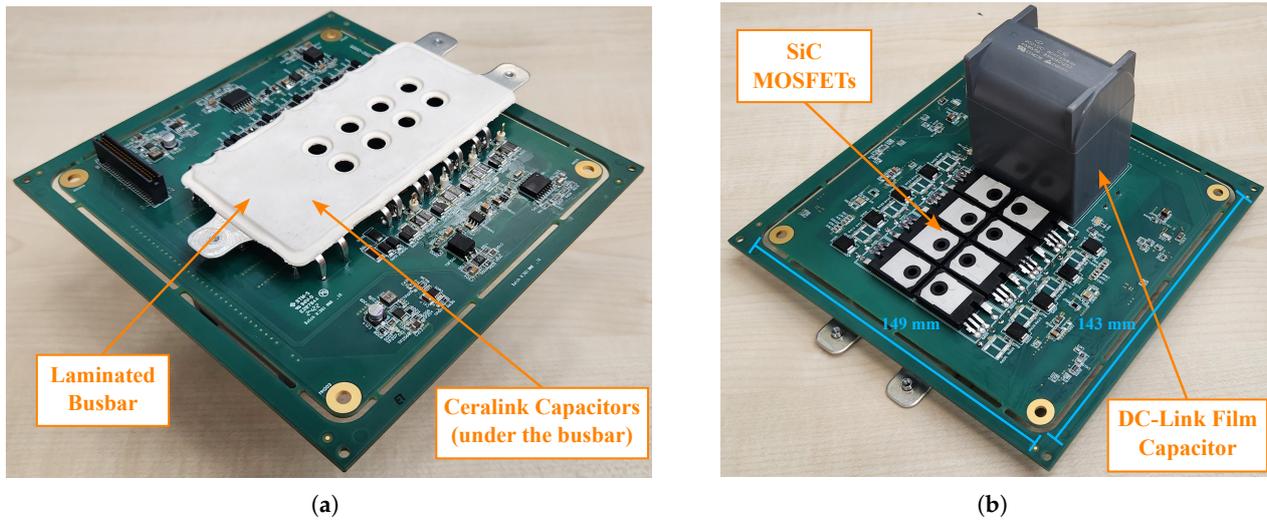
PCB images, (a) top side of the PCB, (b) bottom side of the PCB.
